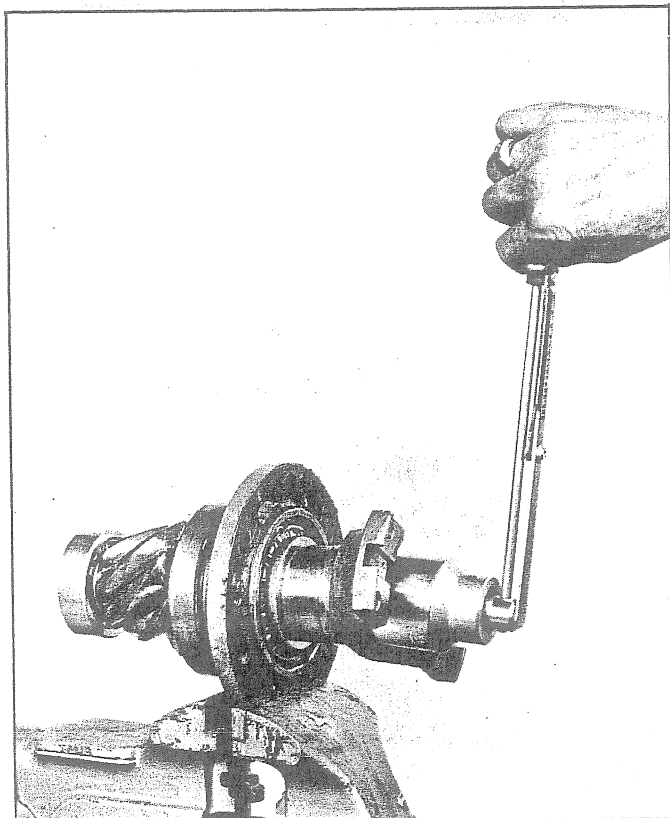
Checking Rolling Torque of Pinion Bearings
